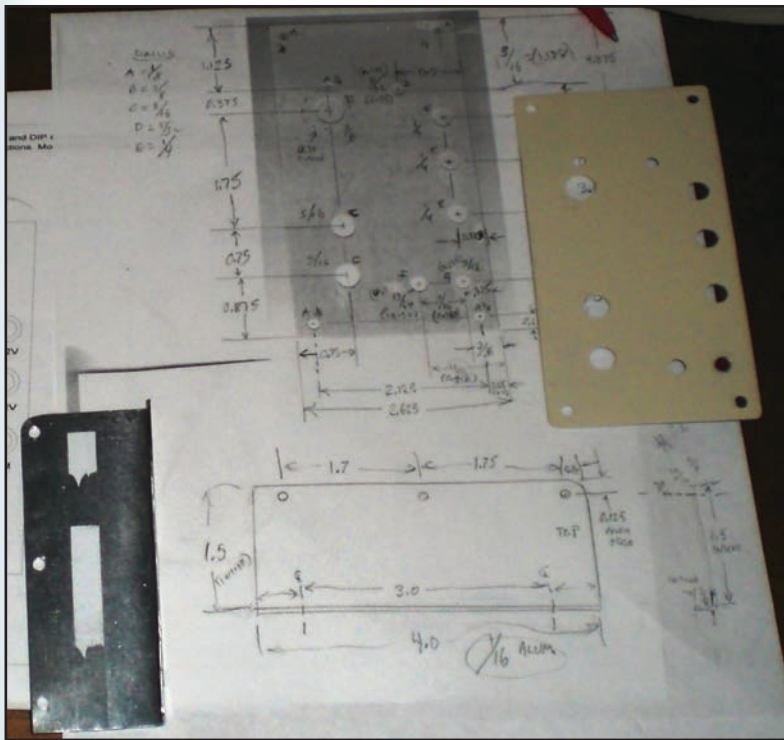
I made a right angle bend to attach to the front control panel. Pictured are the front mounting bracket, the front control panel, hand drawn dimensions, and drill codes.
